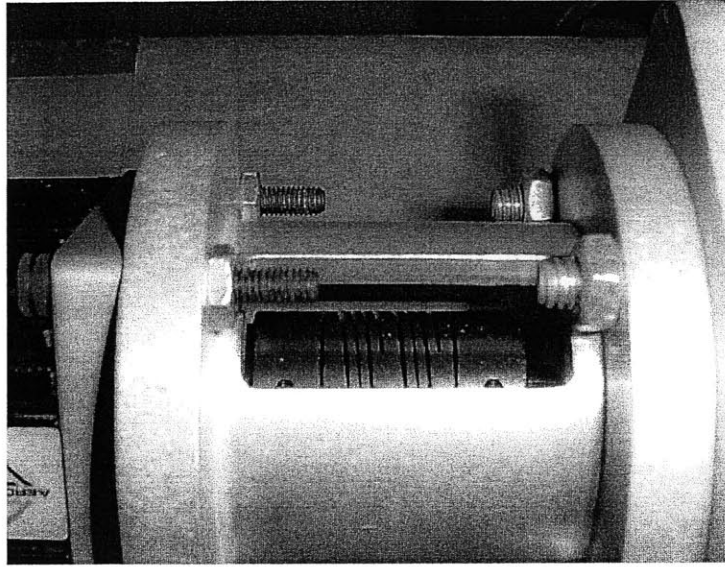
Helical beam coupling joining motor shaft to screw.
